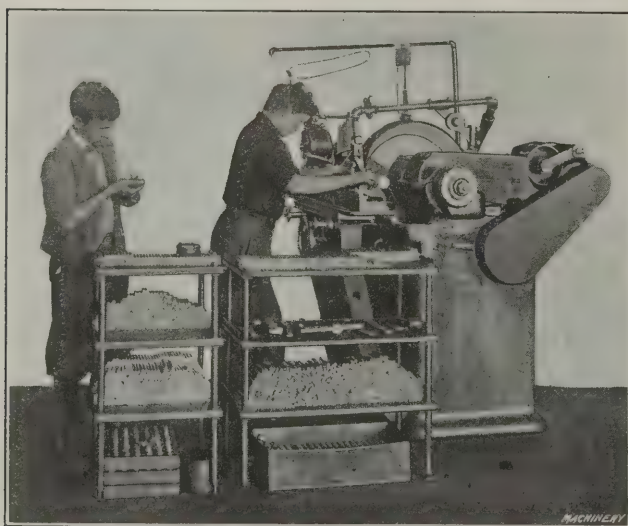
Grinding Small Motor Shafts. Grinding Machine made by Apprentices
